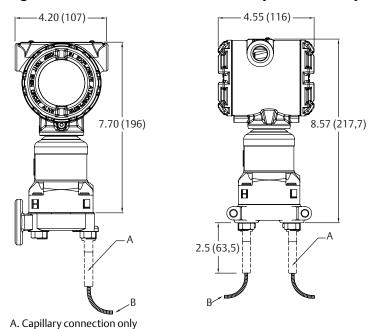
Rosemount 1199 Remote Seal System Assembly shown with Rosemount 3051S Scalable Transmitter
